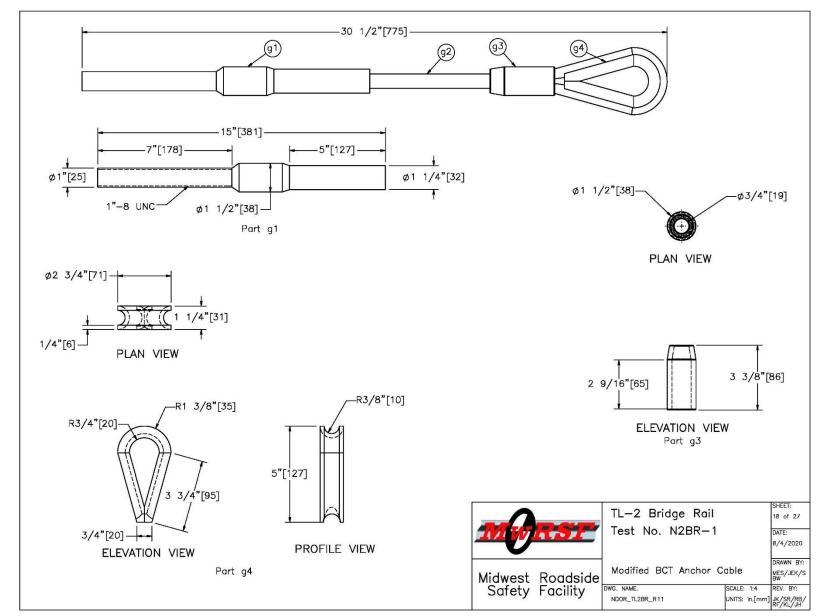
Modified BCT Anchor Cable, Test No. N2BR-1
